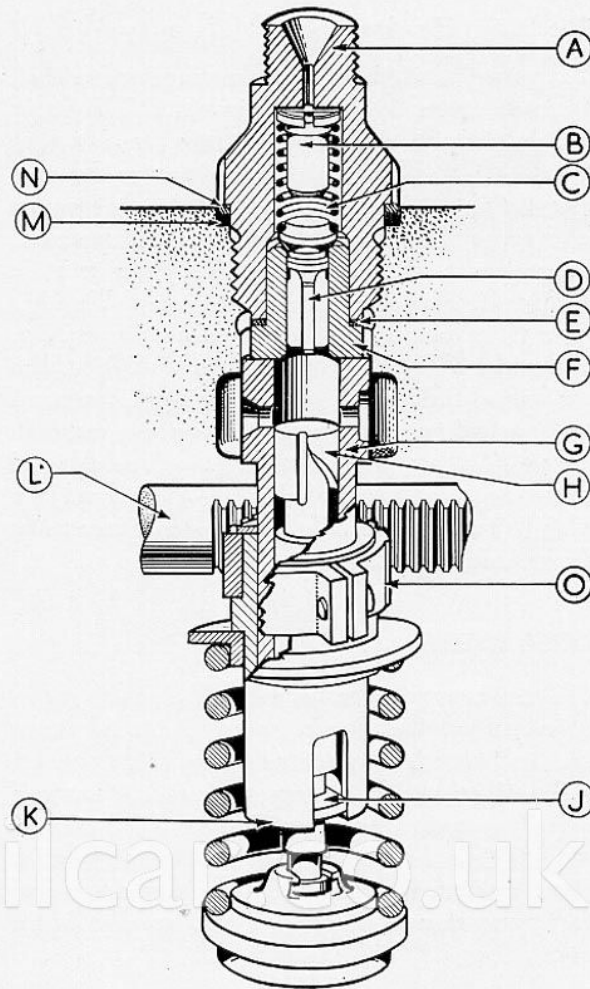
SECTIONED VIEW OF PUMPING ELEMENT AND DELIVERY VALVE
